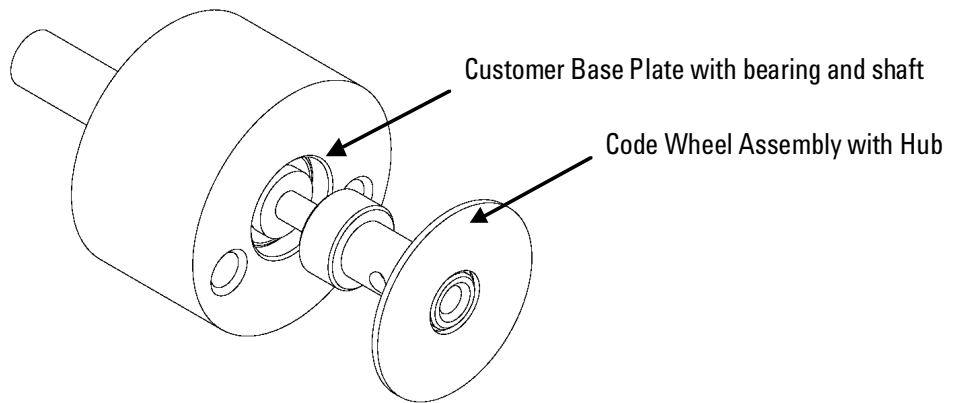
Typical Integration of Customer Components and Code Wheel Assembly.
